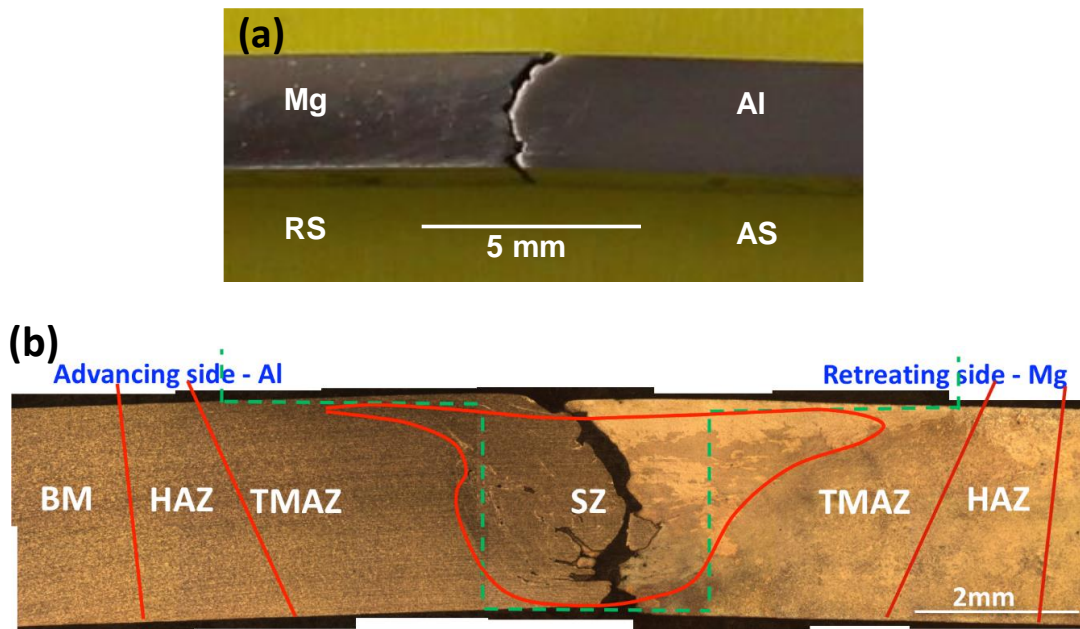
Dissimilar FS welded specimen using 1400 rpm and 500 mm/min fractured after tensile loading, (a) macroscopic observation (b) etched specimen observed with an optical microscope.
